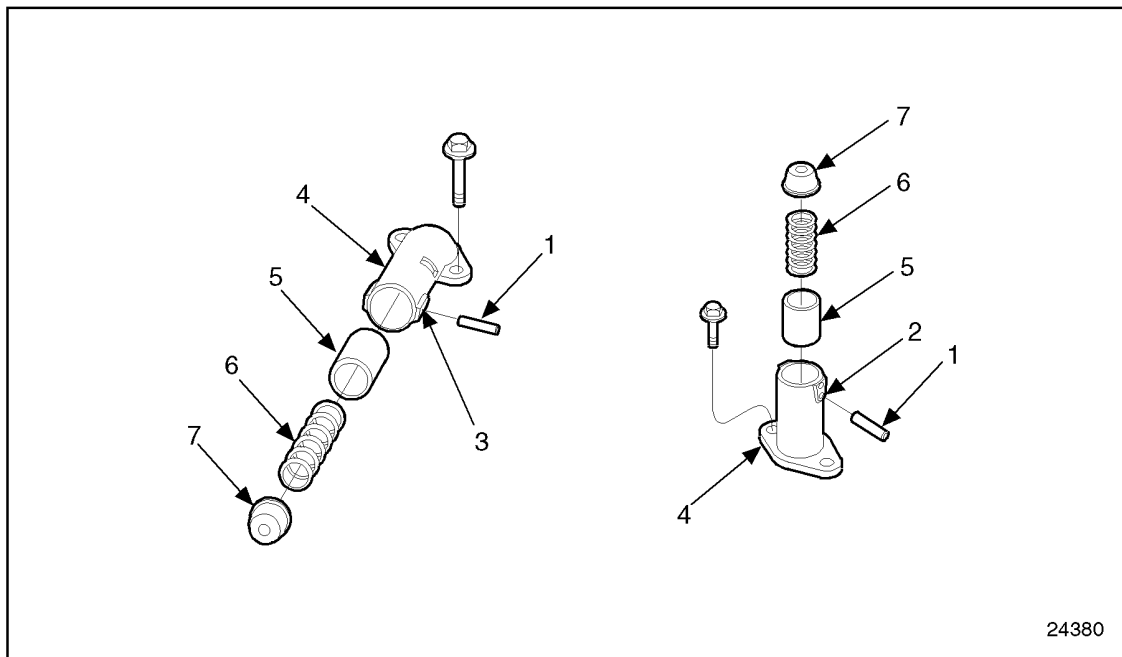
Oil Pressure Regulator and Relief Valve Mounting
